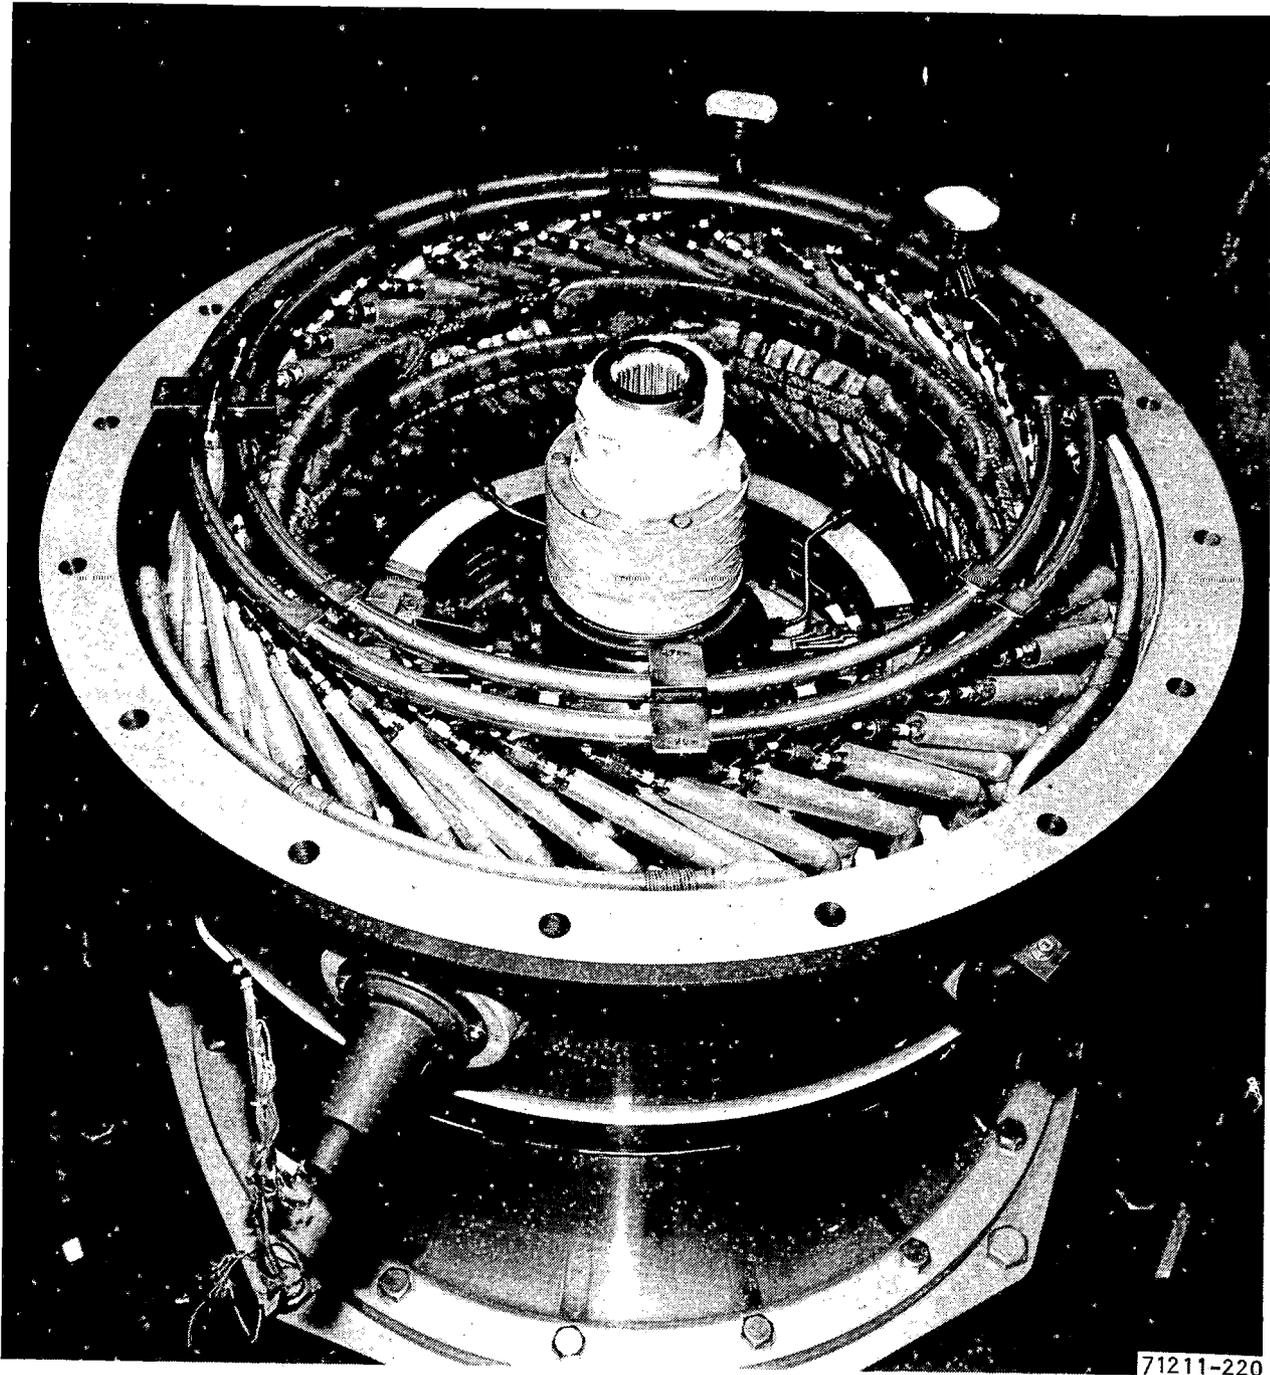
Stator Coil Coolant Transfer Tube and Manifold Assembly (Prior to Shrinking Installation)
